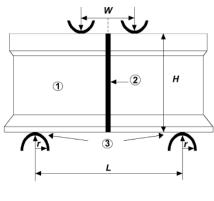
Test scheme of fatigue test of flash butt welding joint of rail
